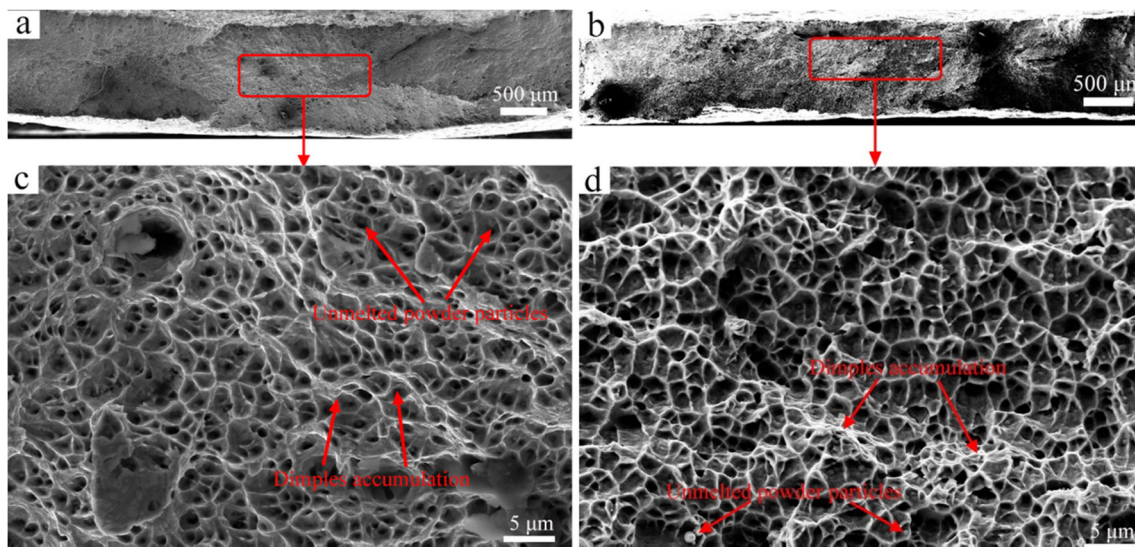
Tensile fracture surfaces of HASP samples in a HASP before applying solution heat treatment and b after being solution heat treatment conditions. Higher magnification of dimples on fracture
